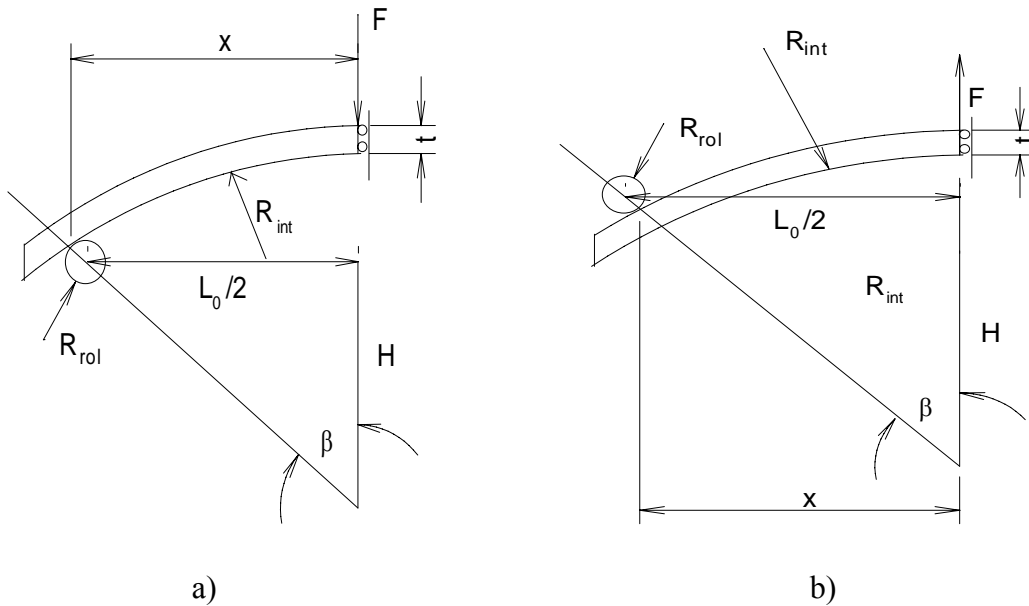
a) Specimen tested with the concave side down; b) Specimen tested with the concave side up.
